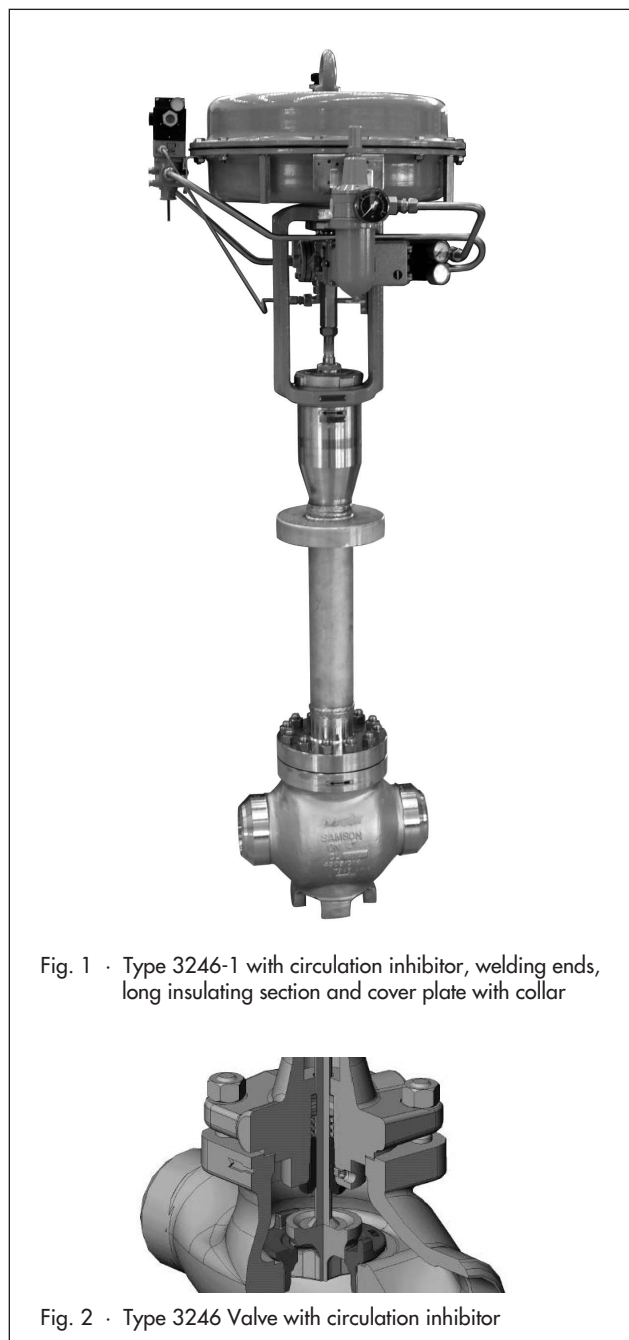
· Type 3246-1 with circulation inhibitor, welding ends, long insulating section and cover plate with collar
